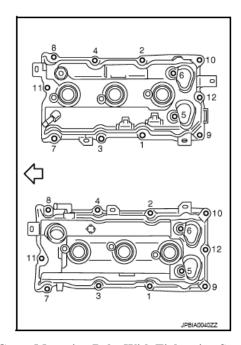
Identifying Ignition Coil, Spark Plug And Rocker Cover Mounting Bolts With Tightening Sequence Courtesy of NISSAN NORTH AMERICA, INC.
